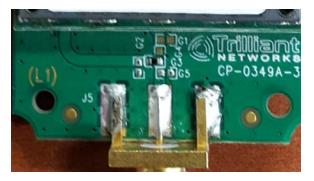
FCC and ISED approved trace design layout and picture for external antennas of section 4.3
